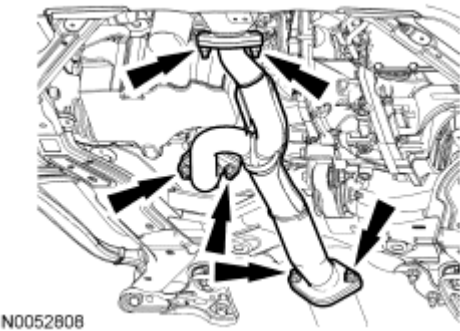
Locating Y-Pipe Nuts & Y-Pipe Assembly
